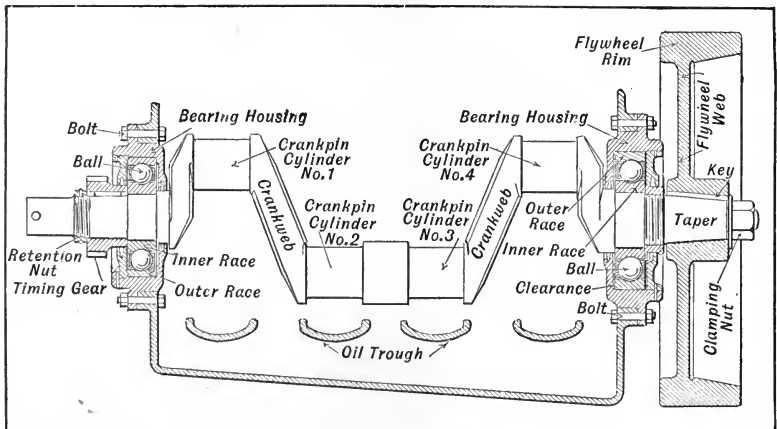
Design of Four-Cylinder Crank Shaft Mounted on Two Annular Ball Bearings. Note Method of Fly-wheel Retention by Key and Taper and Bearing Housing.
